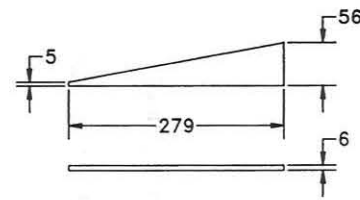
New Jersey Connector Plate Fabrication Details, Design No. 1
